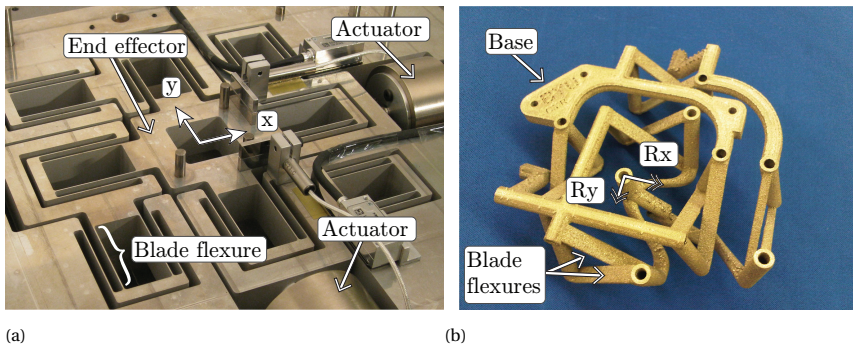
(a) Flexure-based xy-stage fabricated by conventional wire-electrical discharge machining [11, 12]; (b) Flexure-based tip-tilt mechanism fabricated by additive manufacturing [13], showing the same blade flexure designs despite the improved design freedom.
